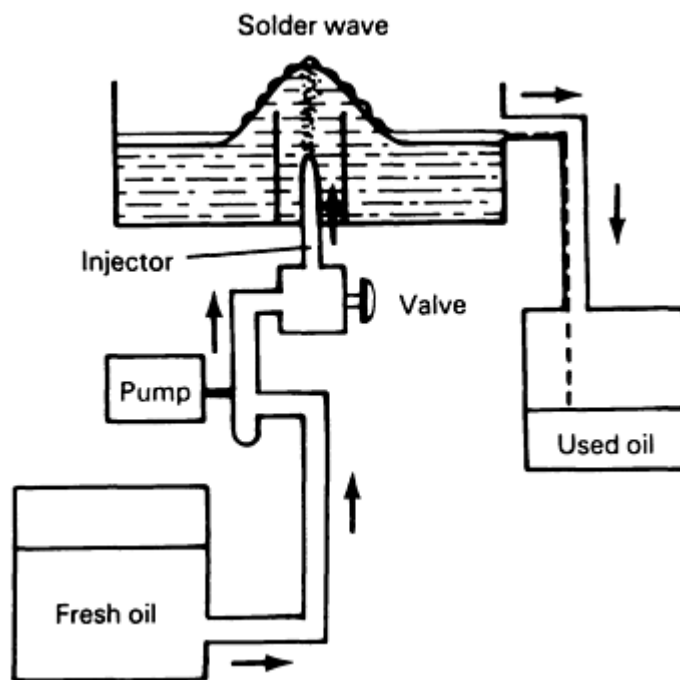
SCHEMATIC SHOWING SIMPLE OIL INJECTION OF A SOLDER WAVE
